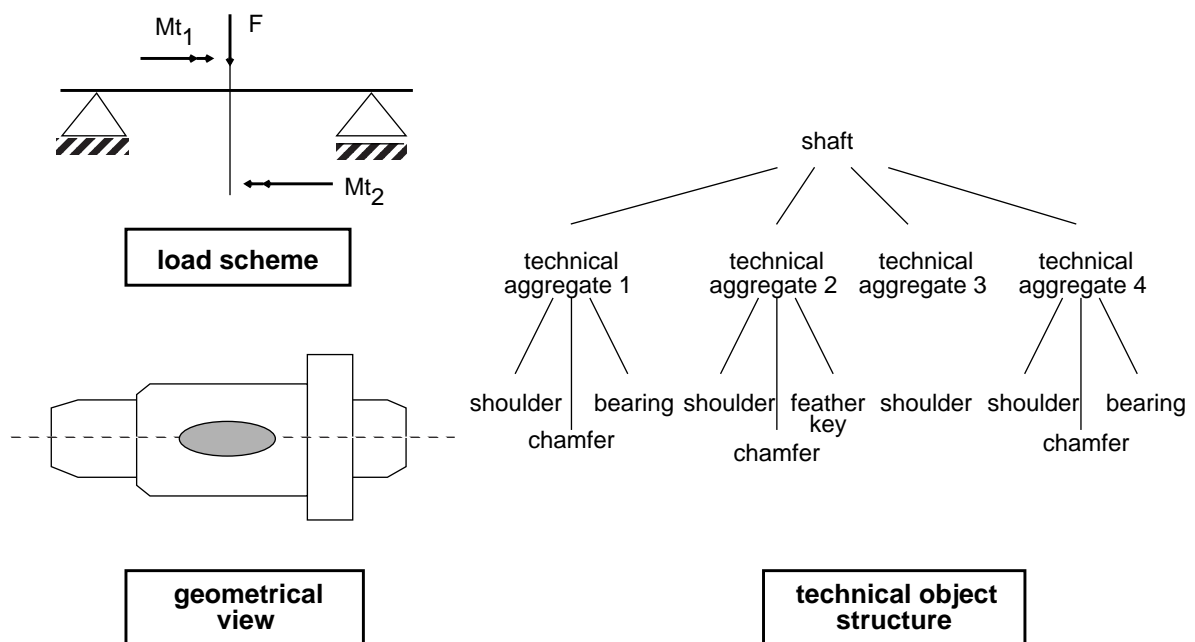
Load scheme, geometrical view, and technical object structure of a shaft design
